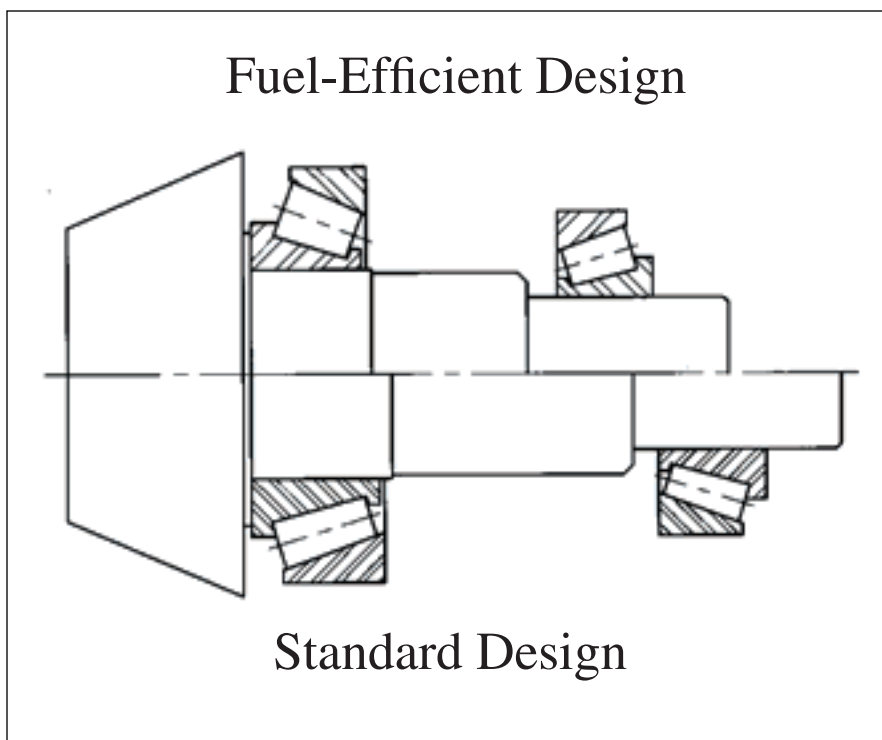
The Fuel-Efficient Bearing Design Reduces the Axle Size and Weight.
